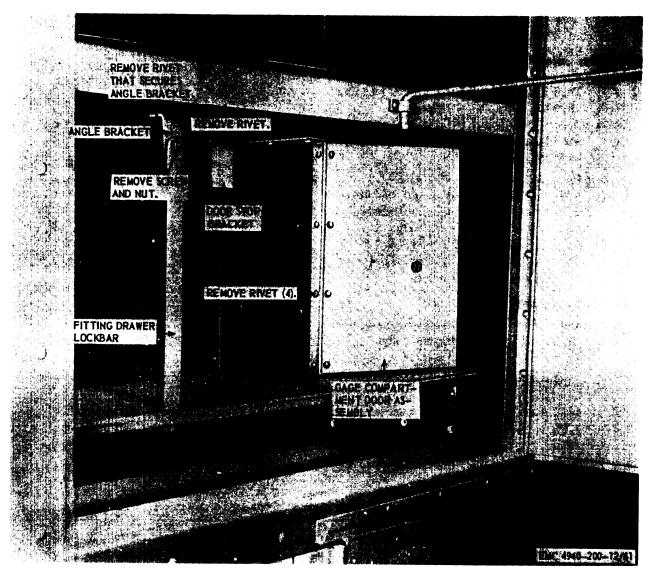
Gage compartment door, door stop bracket, and fitting drawer lockbar, Model SECM, removal and installation.
